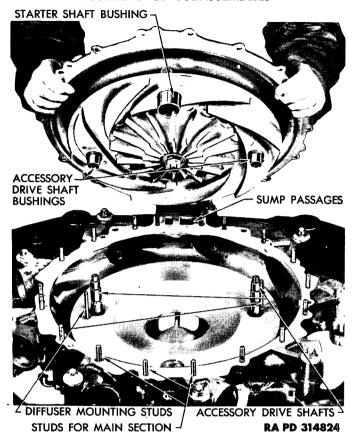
Installing Diffuser Section on Rear Crankcase Section
